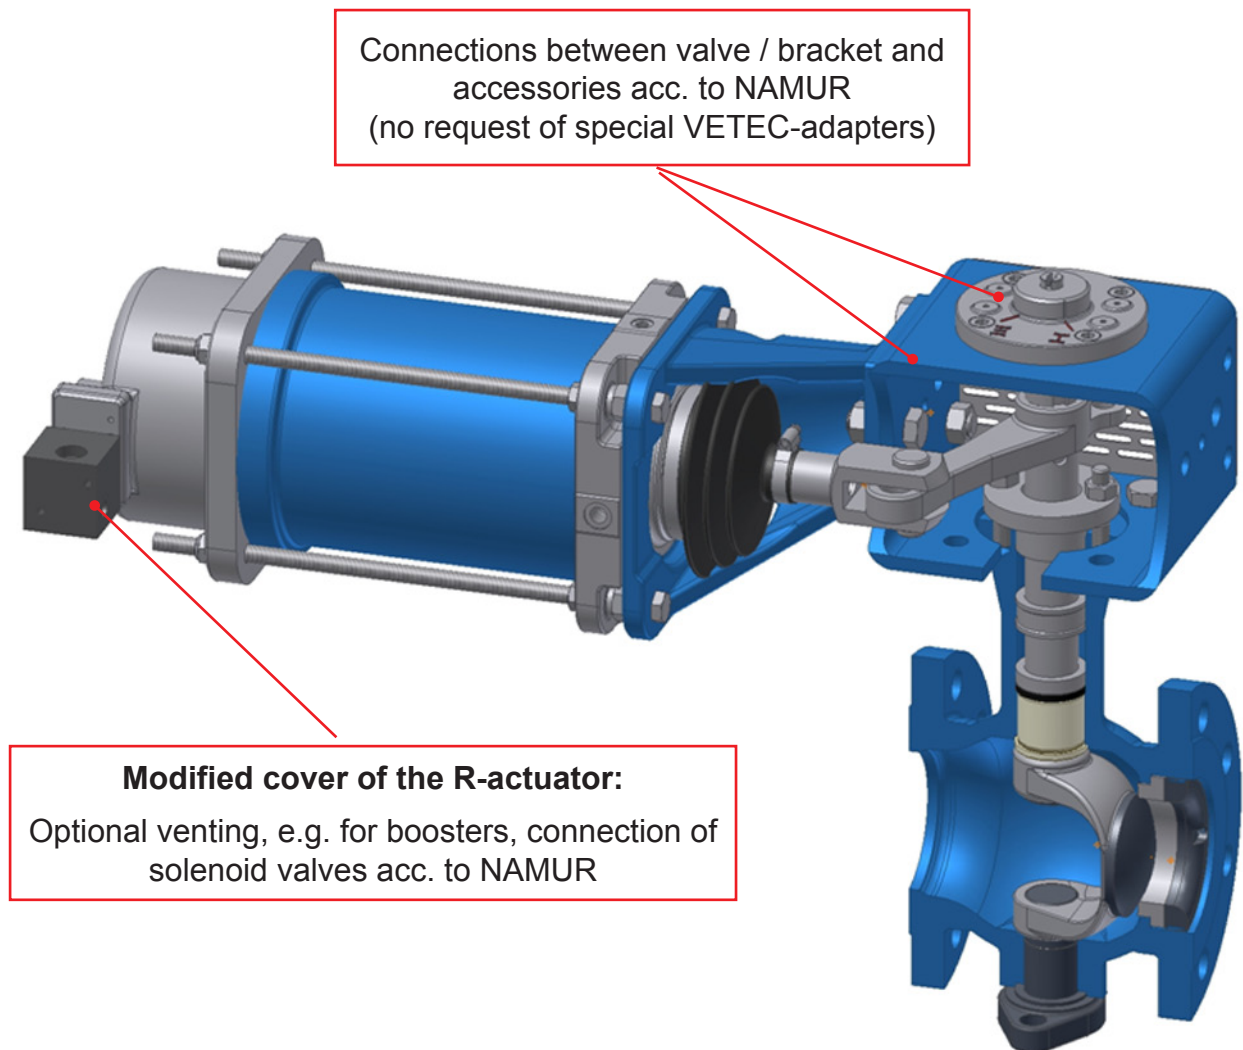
3: Rotary plug valve Type 82.7
